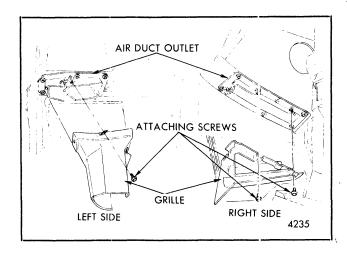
Low-Level Air Outlet Grilles - "B-C-]E" Styles ("A" Style Similar)
